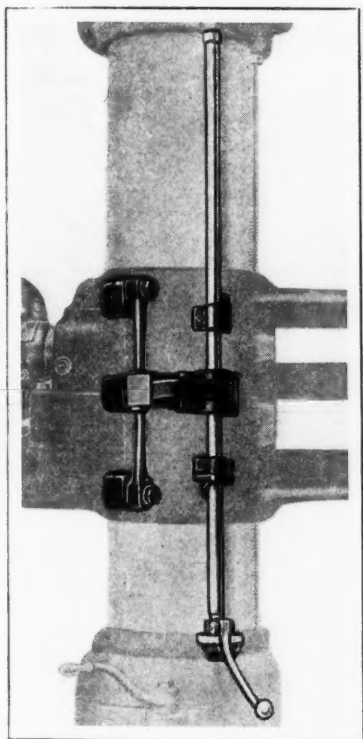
Power Clamping and Elevating Mechanism of American Radial Drills
